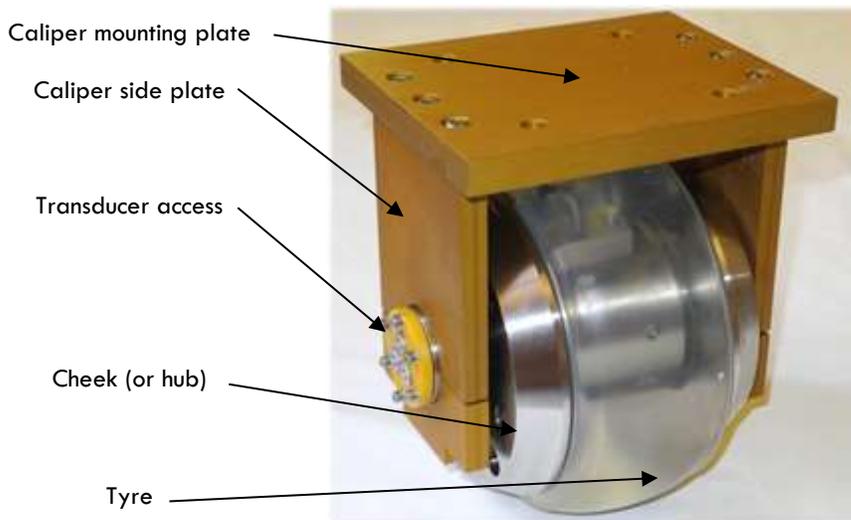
PARTS OF A WHEEL PROBE - 1
